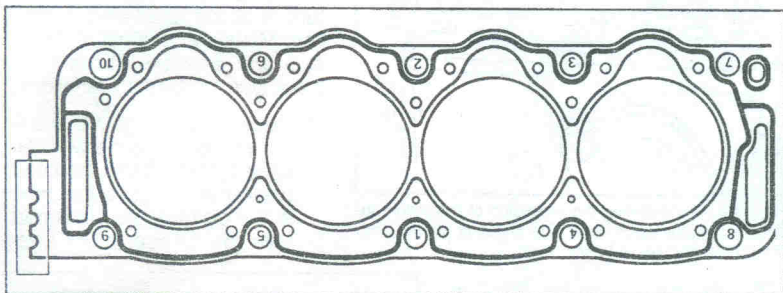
View of the cylinder head with the tightening sequence. Visible on the right is the identification marking of the cylinder head gasket, where either notches (as shown) or holes can be found.
